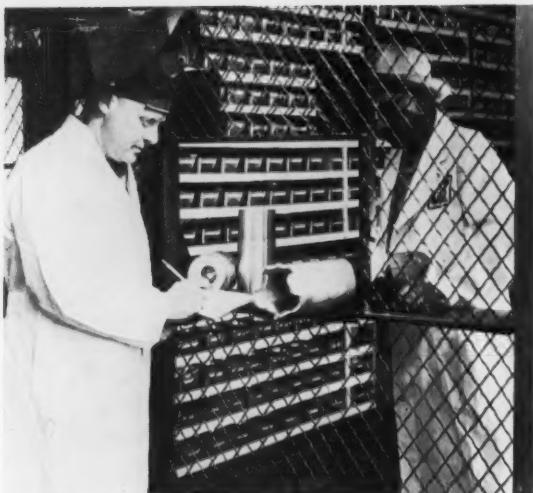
Stock man issuing torsion bar tubes and plugs from stock to a welder.
